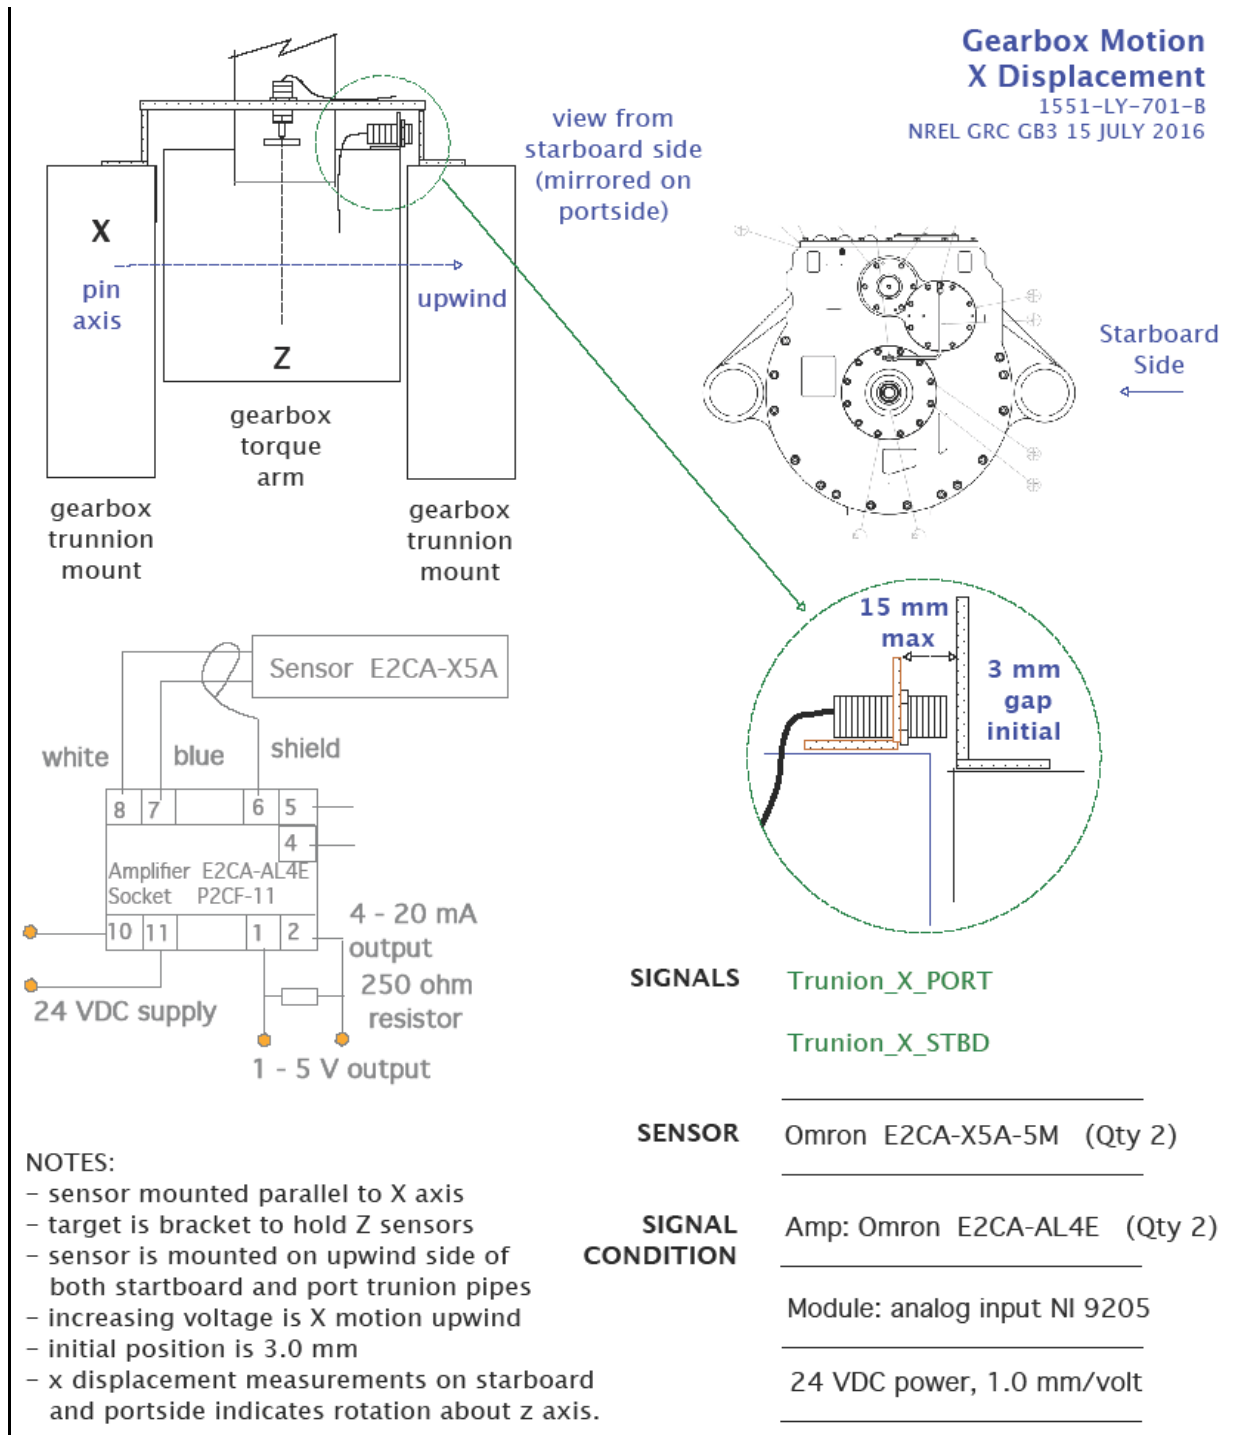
Gearbox axial motion. Illustration by Romax Technology
